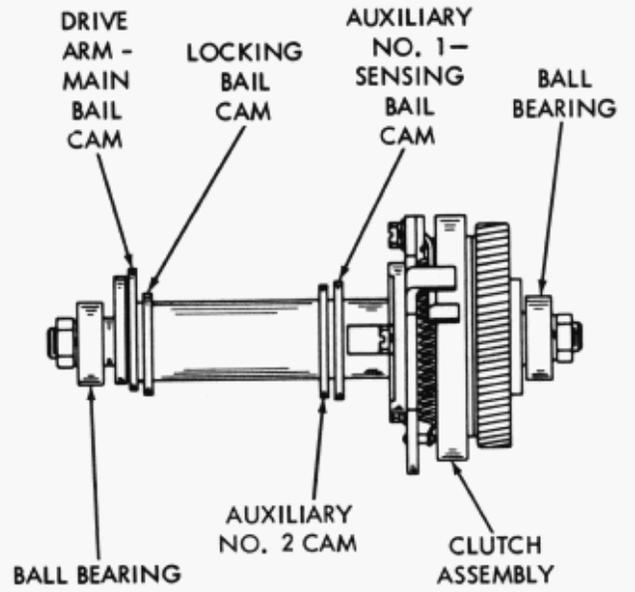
Clutch Mainshaft Assembly, Right Side View
